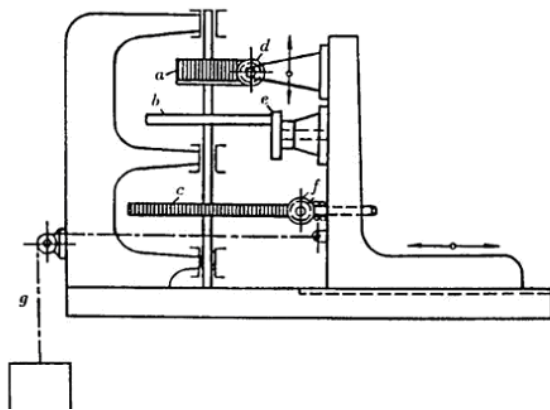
Generation of a non-circular gear, by milling [6]
